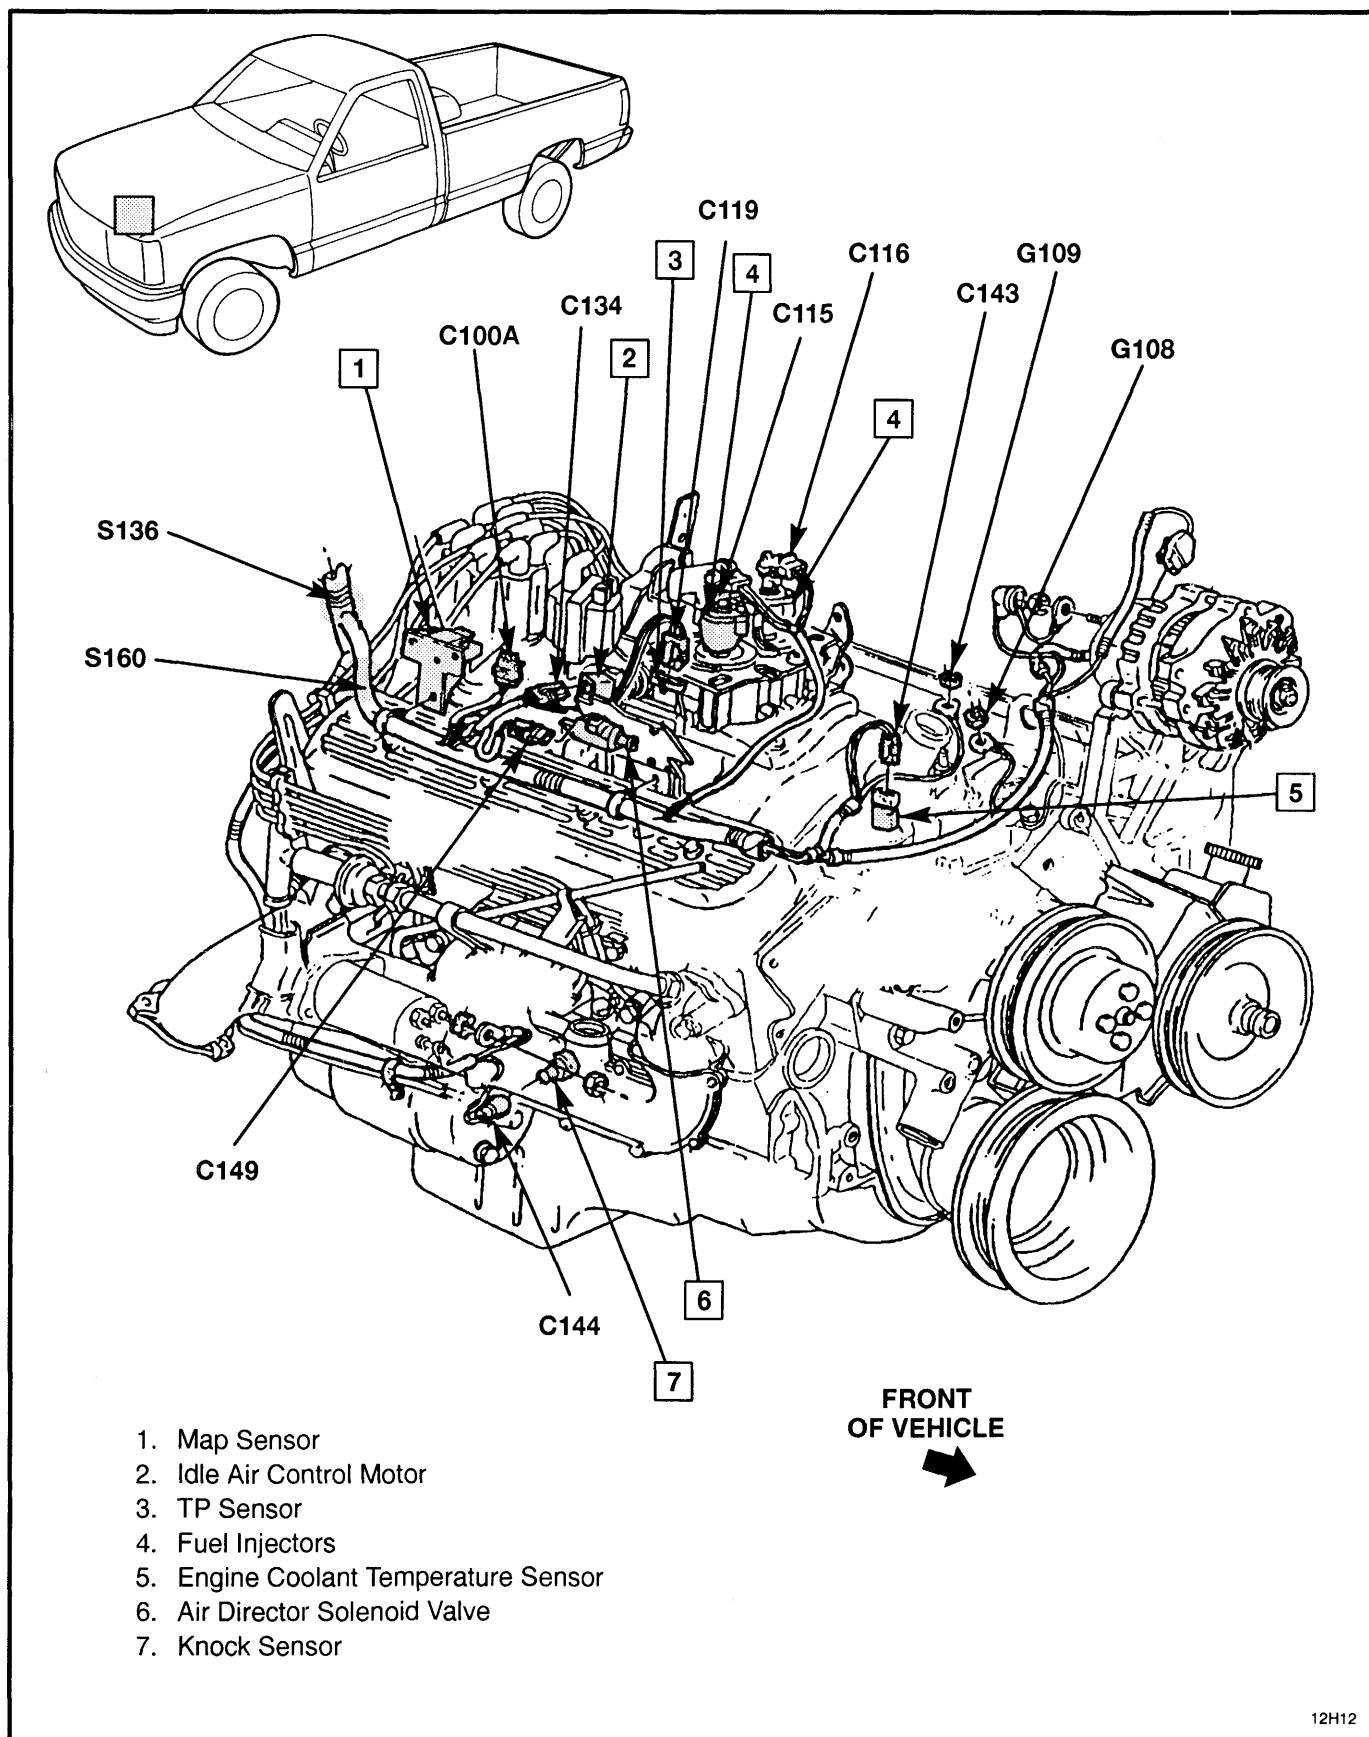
RH Side of Engine, 5.7L (350 CID) Engine — Gasoline
